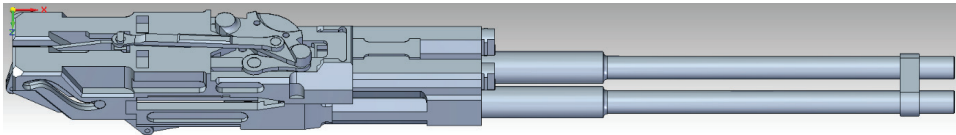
CAD assembly model of the GSh-23 autocannon
